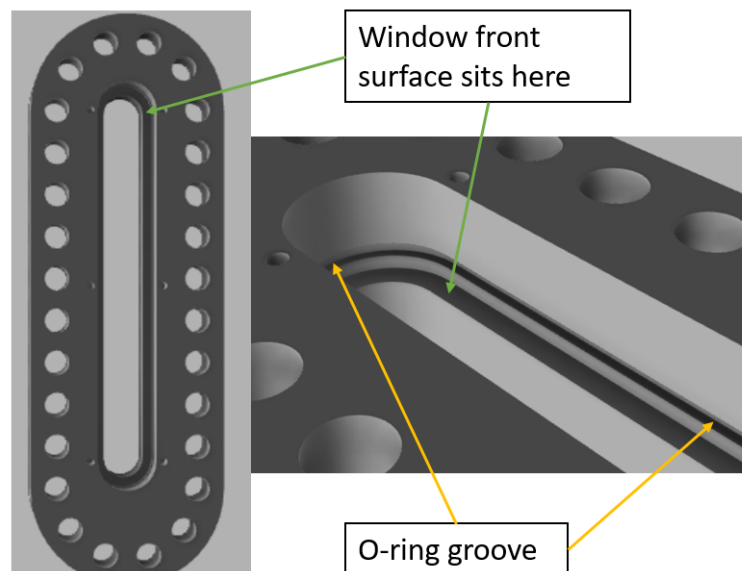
O-ring groove and window bed. Left: Top view of flange. Right: Expanded side view focusing on groove geometry
